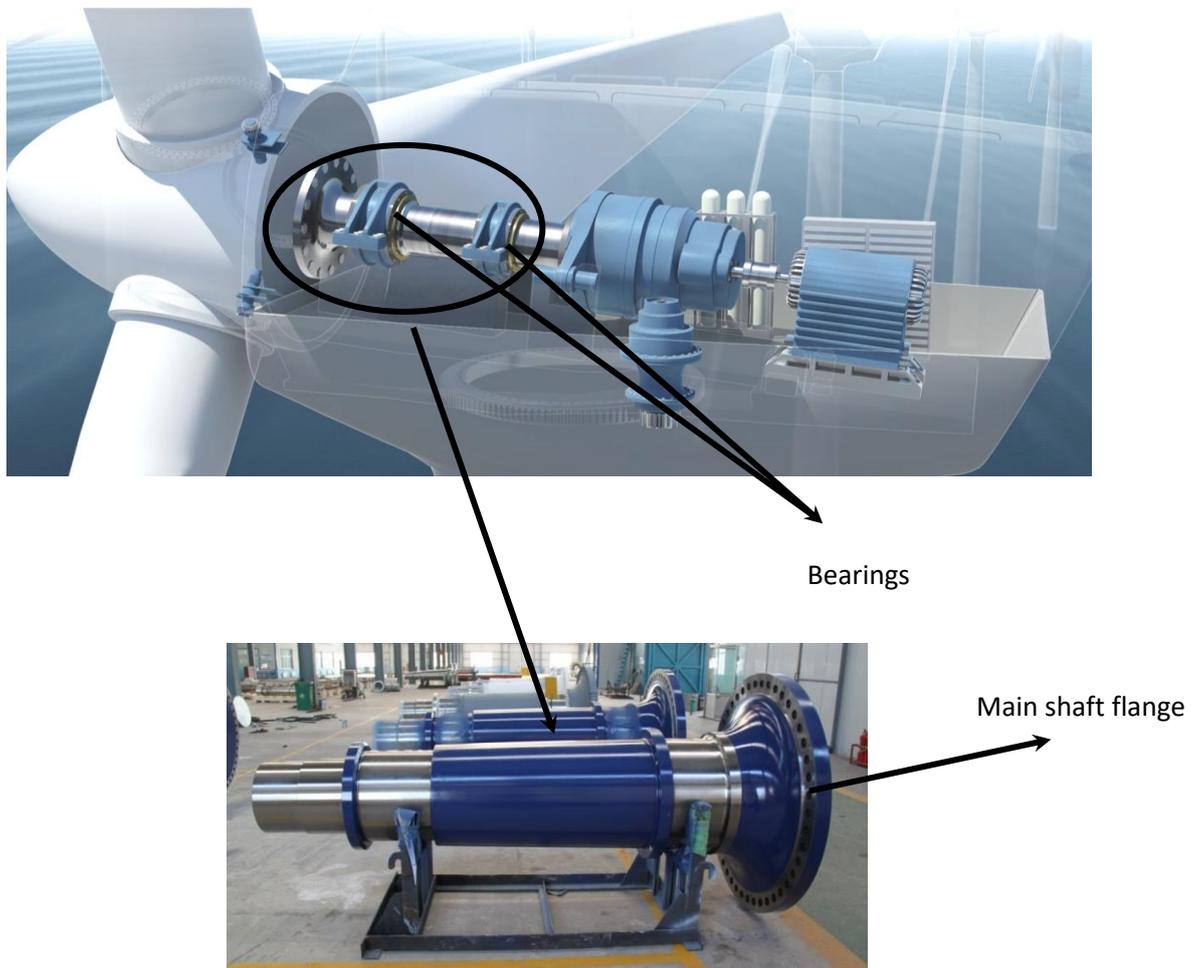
Top: Schematic illustration of the main shaft including its two bearings, Bottom: view of an actual main shaft without bearings.
